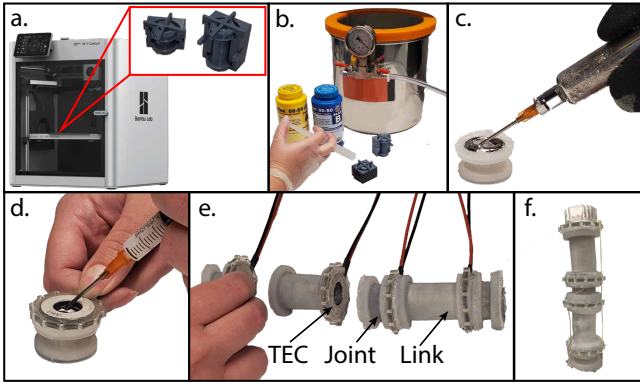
Prototype fabrication steps: (a) Molds were 3D printed; (b) The silicone shell was cast; (c) The shell was filled with LMPA; (d) The TECs were attached; (e) Link and joint sections were attached in series; (f) The final prototype.
